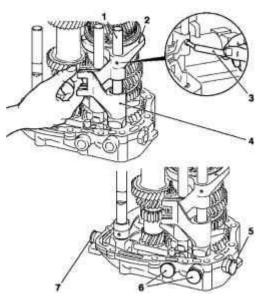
Removing the components of the switching mechanism of 5-th transmission: 1 - gear shift fork rod 1 st / 2 nd 2 - gear shifting fork, 3 - a special tool, 4 - holder of 5-th transmission, 5, 6,7 - Stoppers
